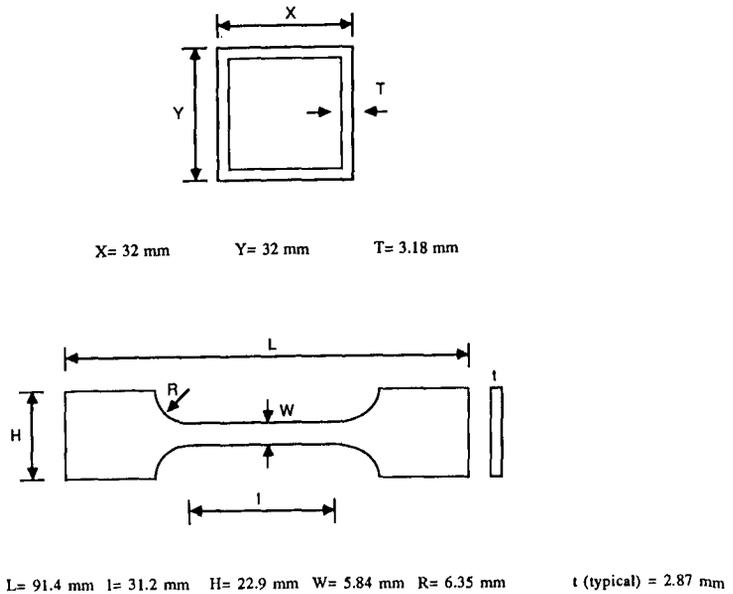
Dimensions of DF6C2, 3, 4 hollow extrusions and extracted tensile specimens.
